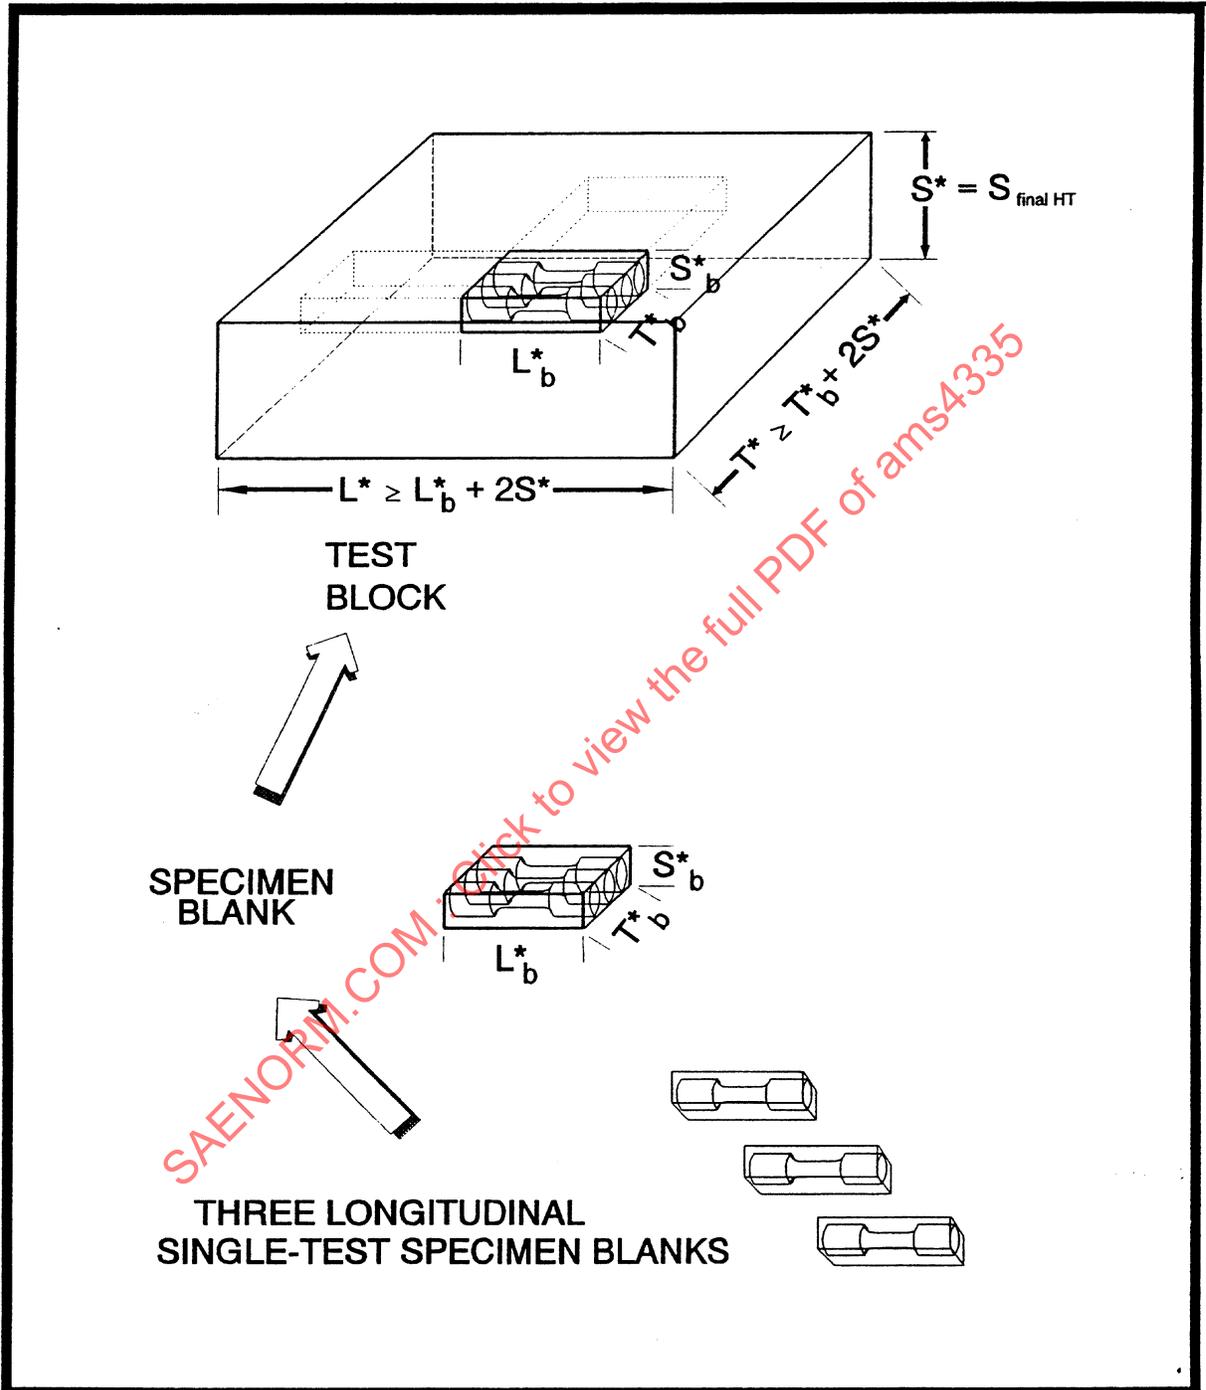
Longitudinal Specimen Blank Design and Test Block Design
